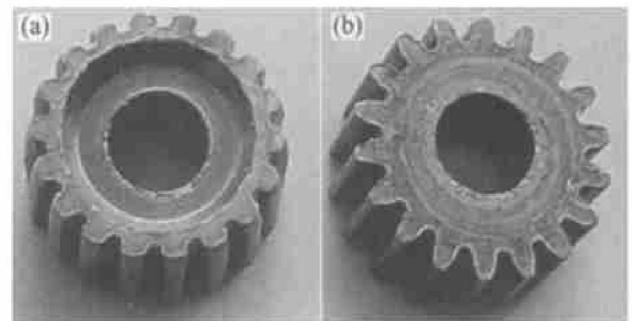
Experimental parts prepared using new process (a) —Blocking part; (b) —Finish forging part
